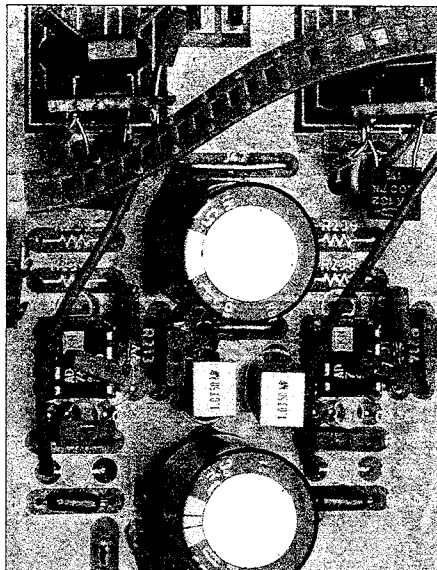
The completed line stage built with Caddock MK132 resistors. R237 and R238 have been soldered to the bottom side of the PC board, allowing easy connection to pins 5 or 6 of the AD744.
